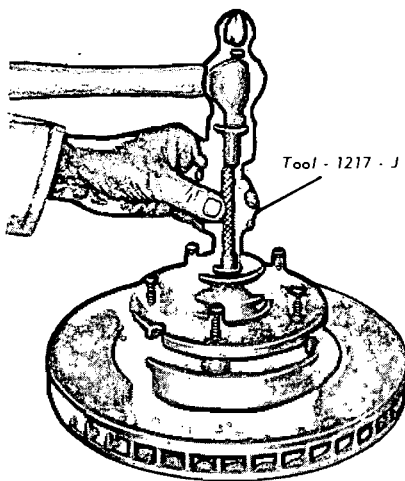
Installing Front Wheel Bearing Cup—Disc
